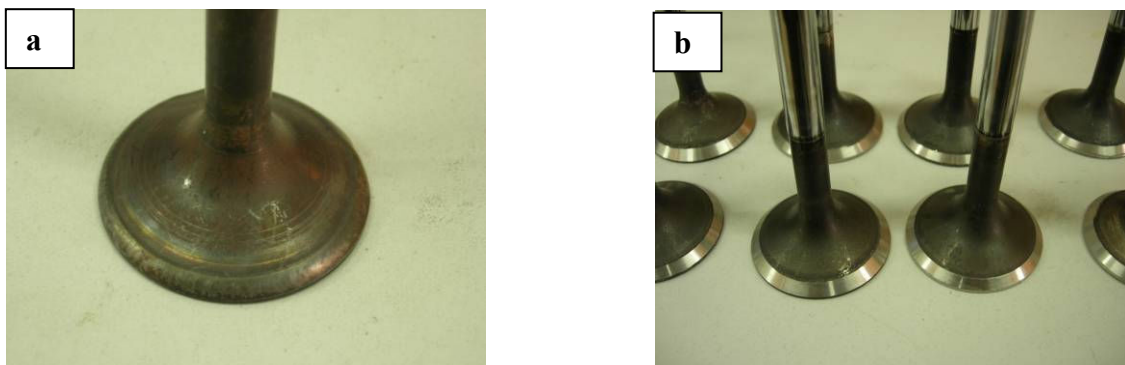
The remanufactured sealing cone of used engine exhaust valves
